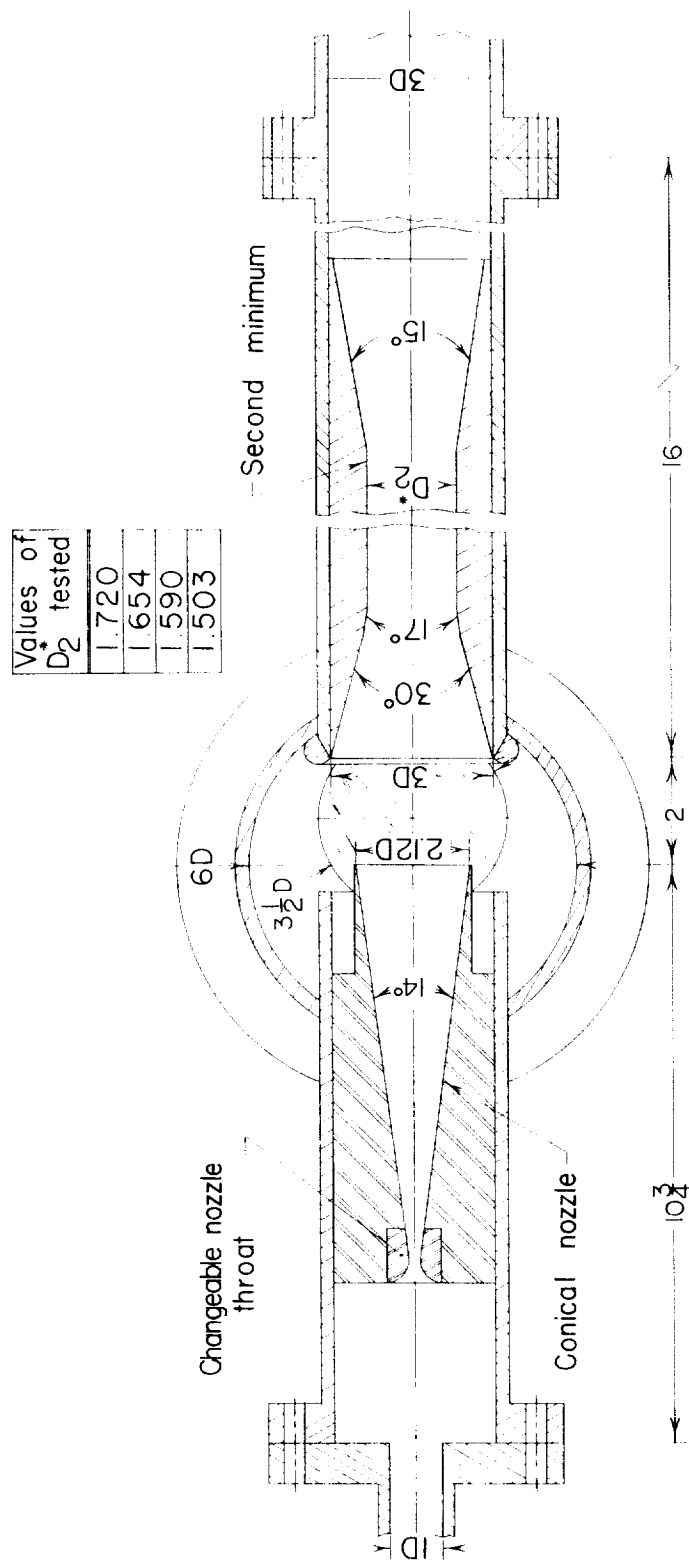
Sketch showing details of open test section. All dimensions are in inches.
